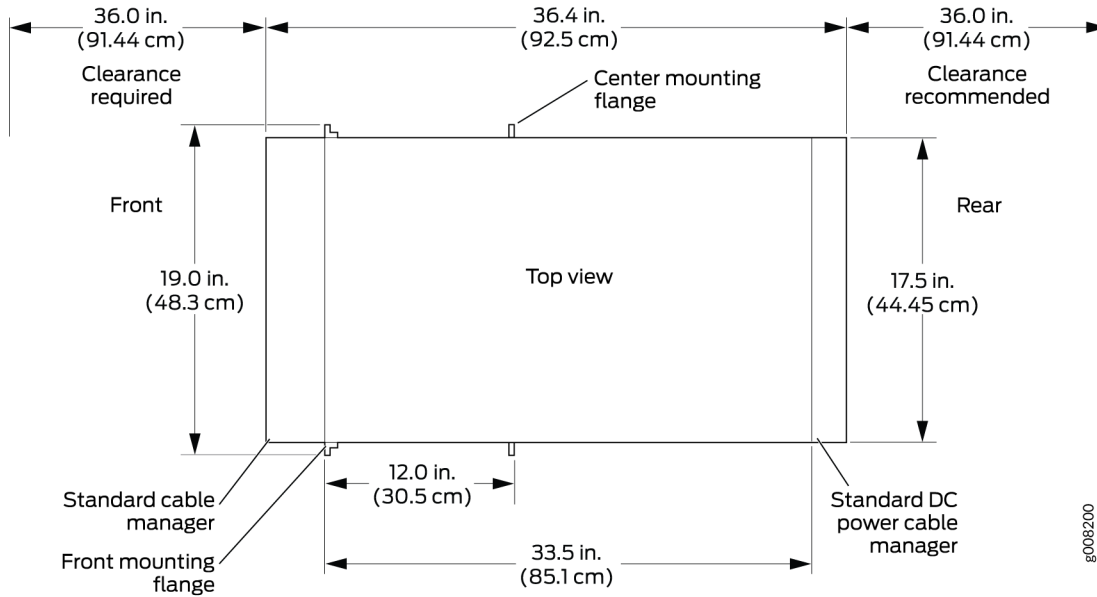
Chassis Dimensions and Clearance Requirements for a DC-powered MX2010 with a Standard Cable Manager
